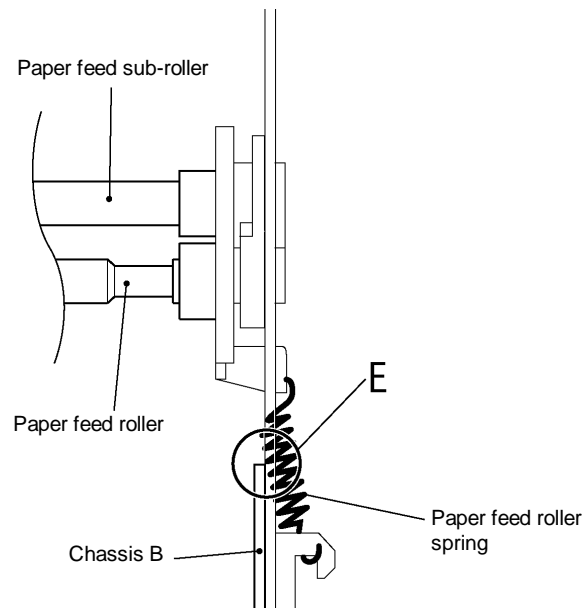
Left/right Contact Points Between Paper Feed Roller Spring and Chassis B
